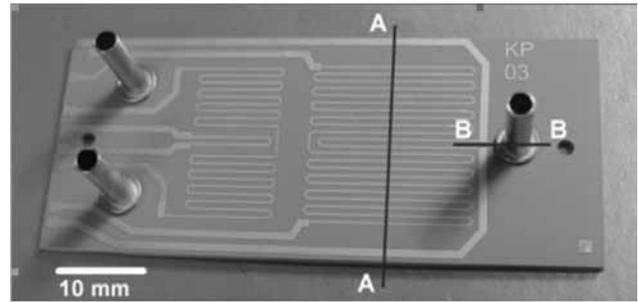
a: The picture of the surface of the horizontally integrated evaporator and reformer realized in LTCC technology.
